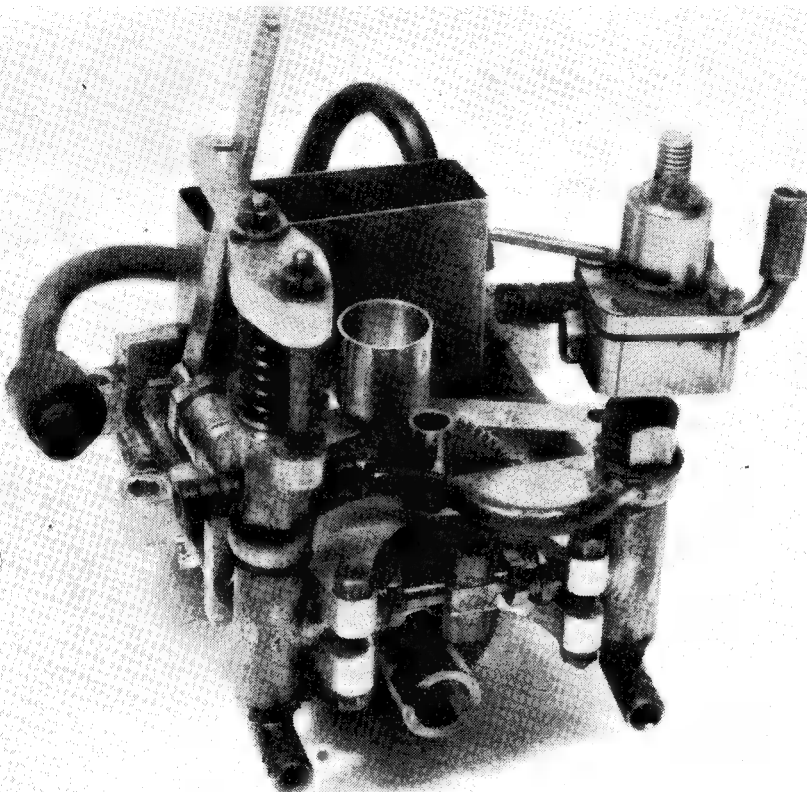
The turbine in its final form, complete with feed pumps and control devices. Weight, 9 ozs.
